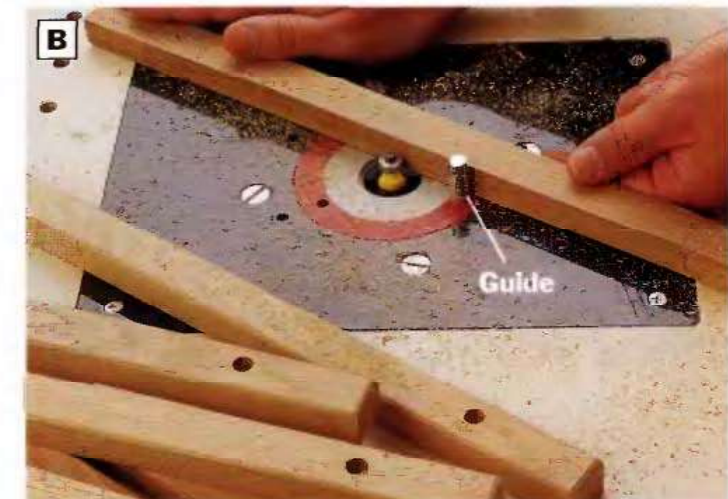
PHOTO B: Ease the edges and ends of the slats and crossbars with a 1/8-in. roundover bit in the router table. Use a pin-style guide on the router table to help control the workpieces as you machine them.
